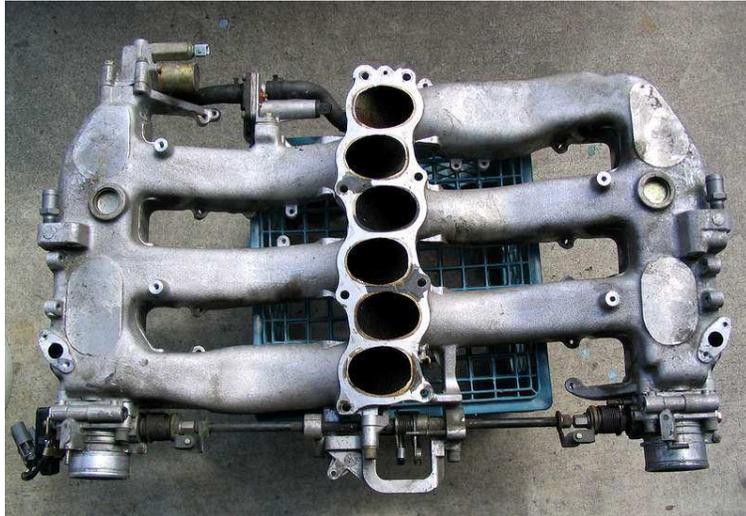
Bottom Side of Plenum with Hoses Already Bypassed
